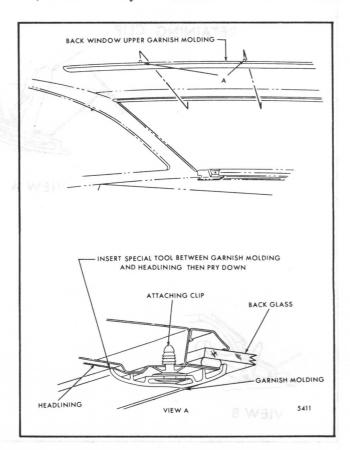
Back Window Upper Garnish Molding - "A" Styles
